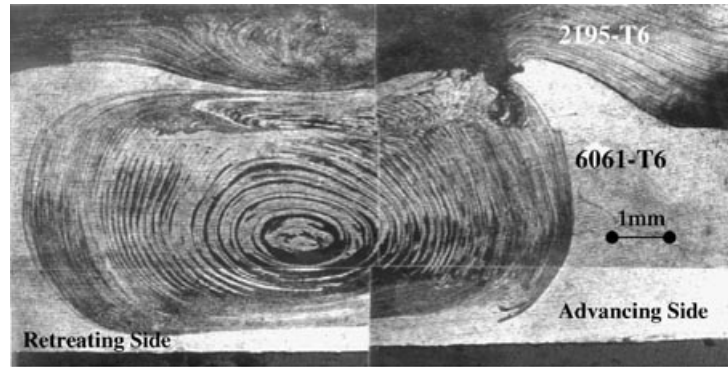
Weld showing the large vertical movement ,with the Al2195 on top and the 6061 aluminum below, during welding (Guerra *et al.*, 2003).
